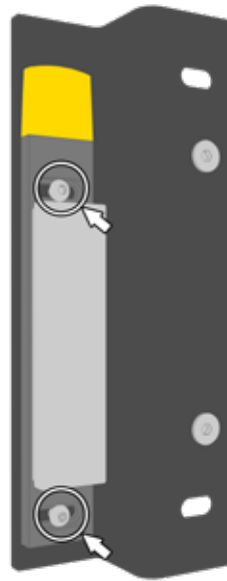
Attach the anchor plate to the mounting plate and tighten the Torx screws M6 x 8 mm.
